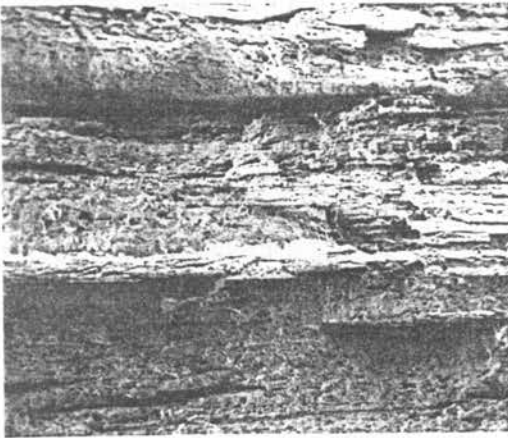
Fracture surface showing (magnification 15x)
